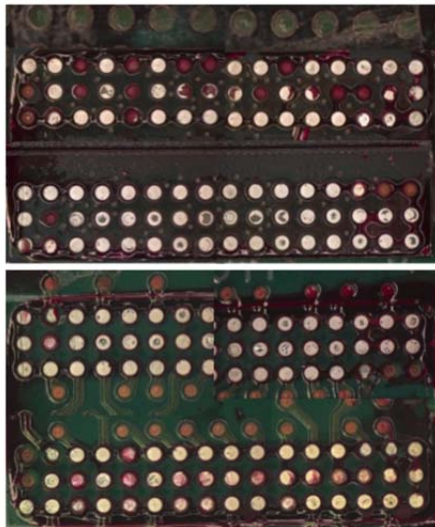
Dye penetration on mixed design, package side (top) and board side (bottom)
